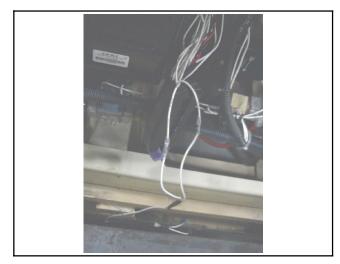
View of Lead #223 Stripped and Crimp Connected to GM64331 (Harness)
